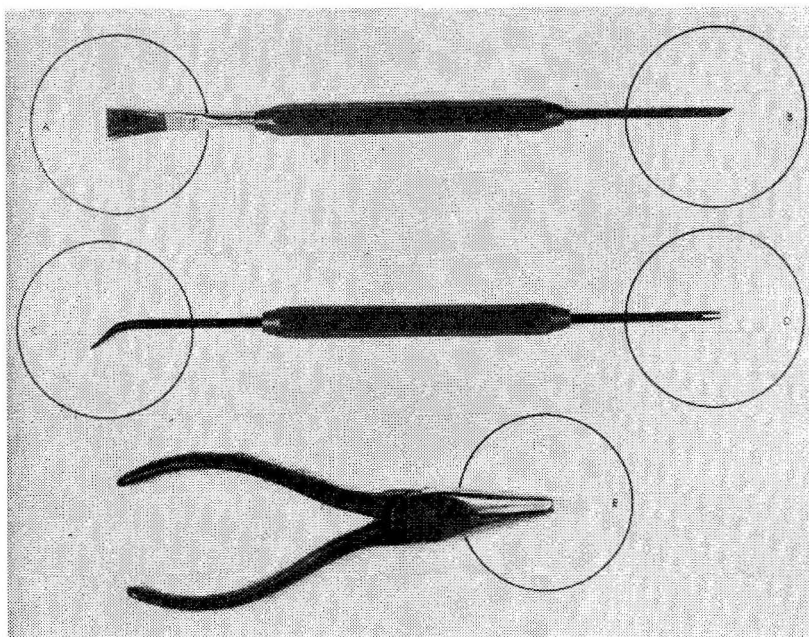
Special tools for servicing etched-circuit boards . . . A — wire brush; B — knife edge; C — bent point; D — double point; E — end cutters.
